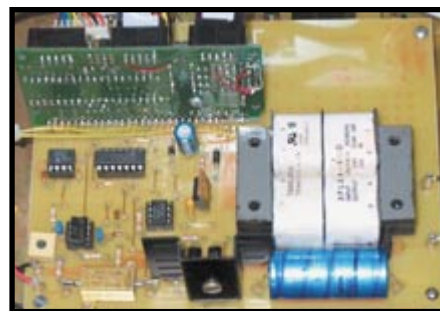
The ground-referenced power supply PCB also contains the SIMM100 MCU daughterboard. The IsoLoop isolators, being SMD components, are mounted on the bottom of the PCB and aren't in view.
